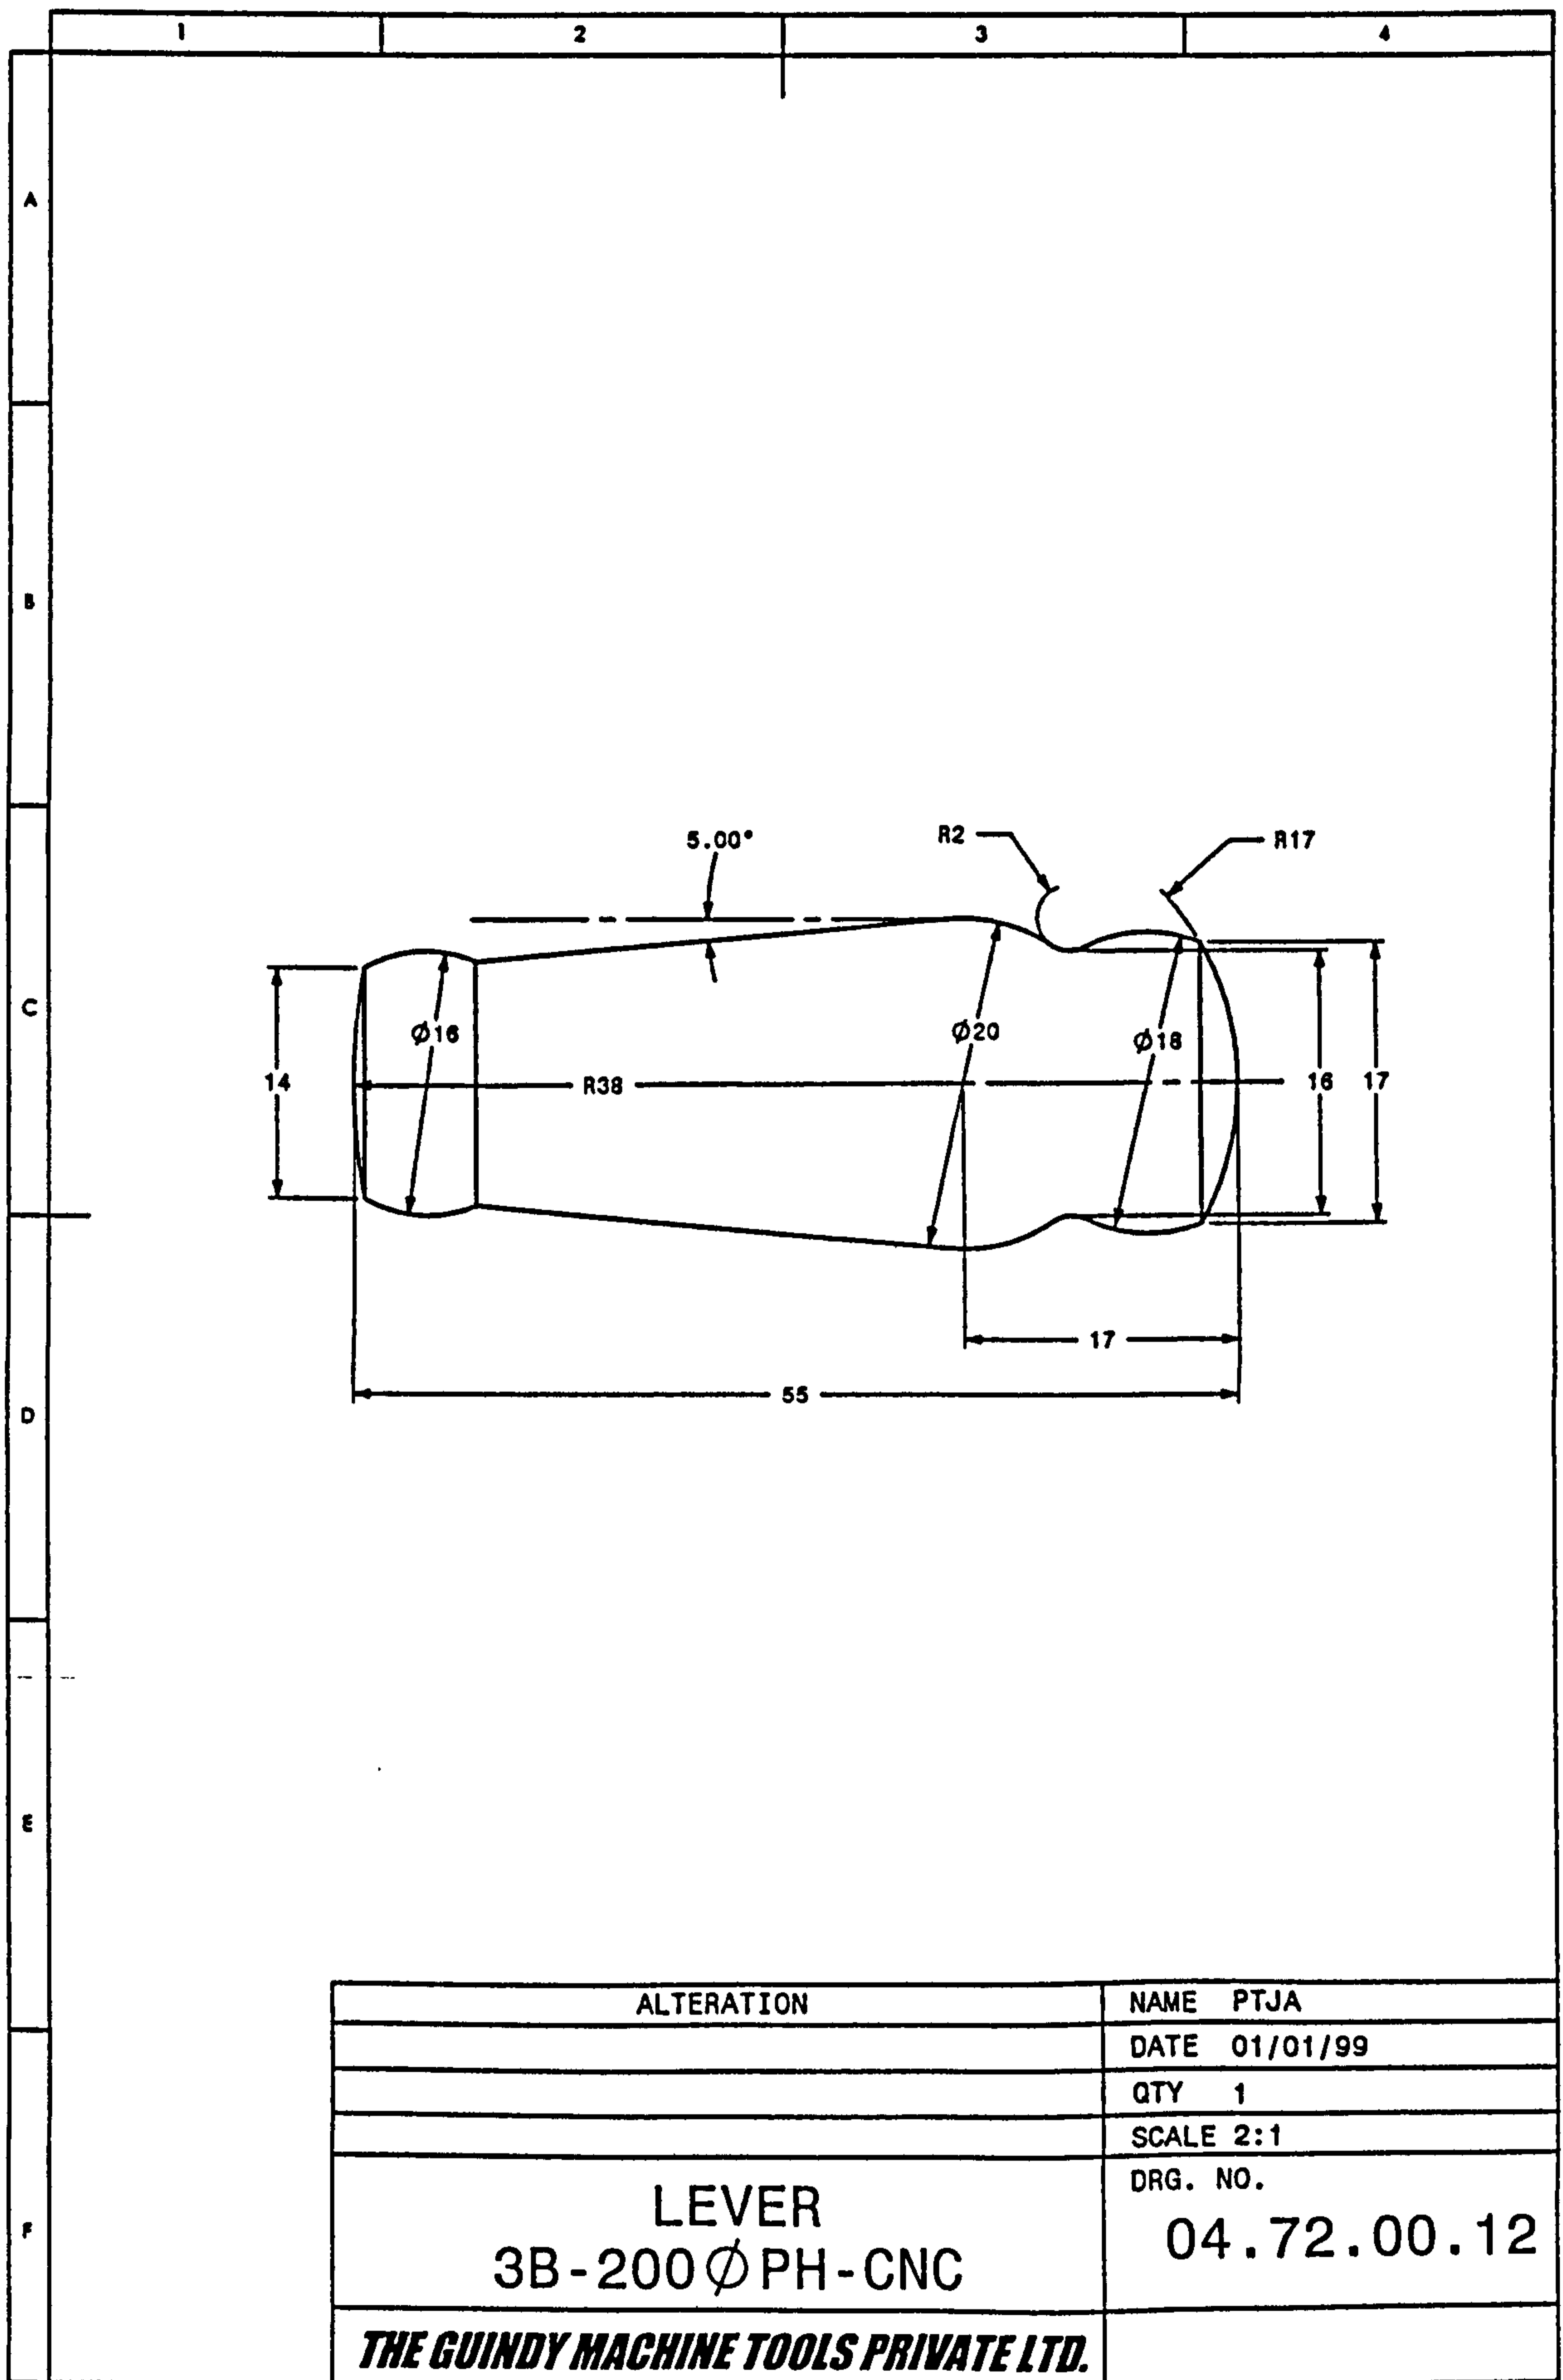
GMT Lever – Pro/ENGINEER Drawing
